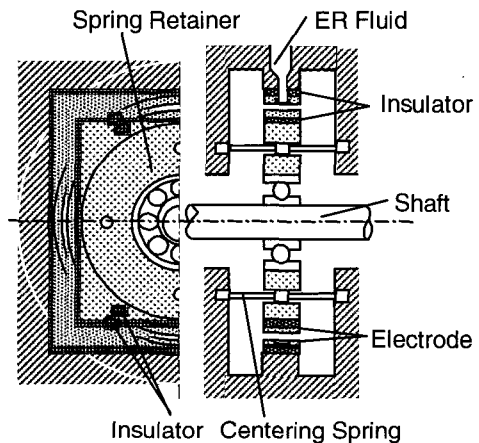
Directional squeeze film damper using ER fluid<sup>55)</sup>
